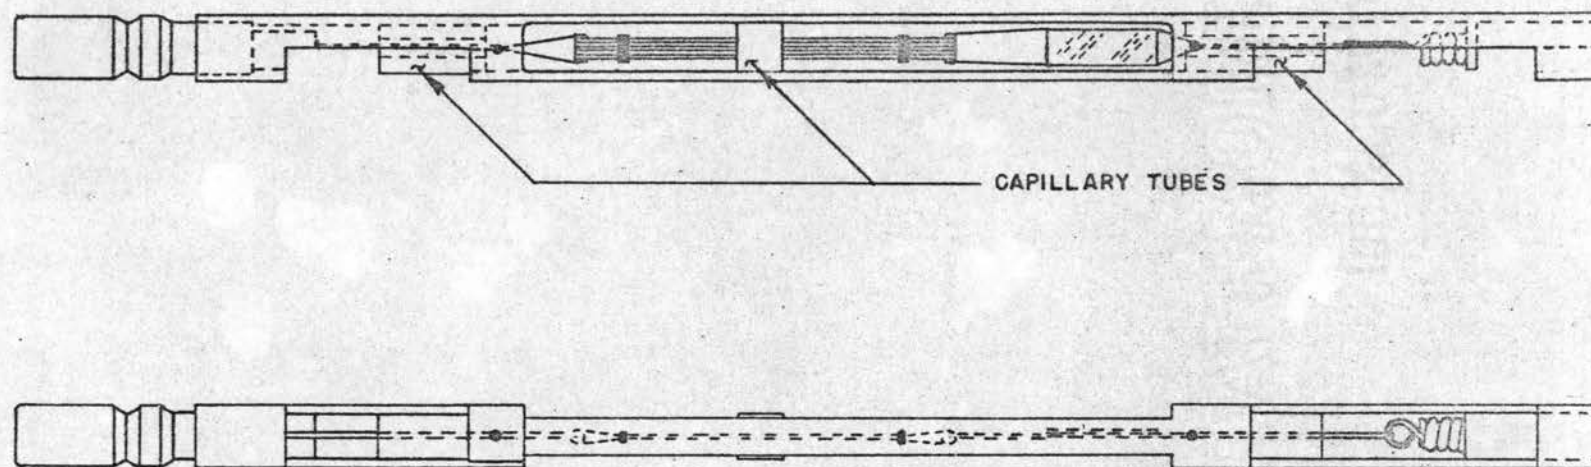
Three-Capillary Tube Coil and Frame Assembly of The Squeezed-Coil Type.
